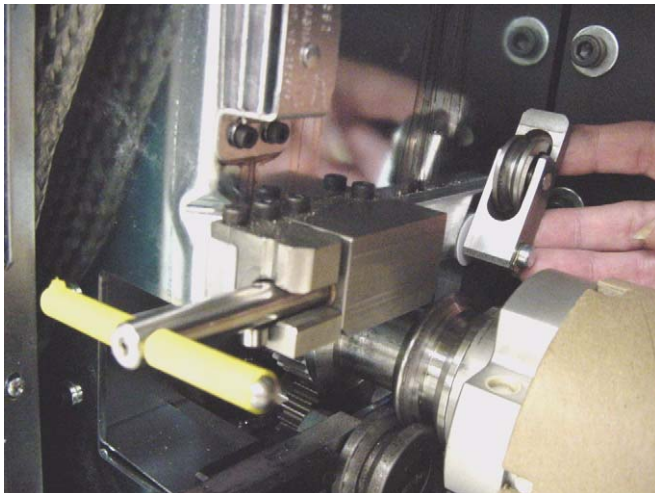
Loading Mechanism Lock Lever Out of Position
